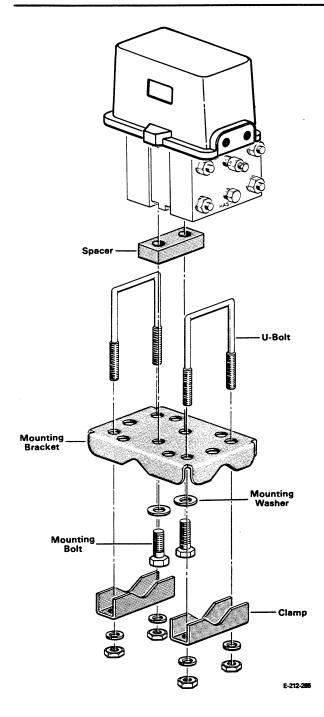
Assembling Optional Mounting Bracket-Kit, Accessory (146), on 397T Transmitters with Flange Face Connections
